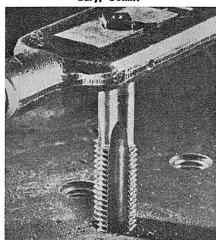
Special drill taps are provided in thread repair kit for threading drilled hole to correct size for outside of thread insert. A standard tap cannot be used.
